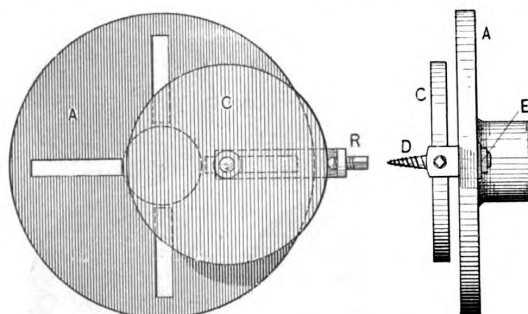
Front and Side Views of Face Plate and Eccentric Chuck.
